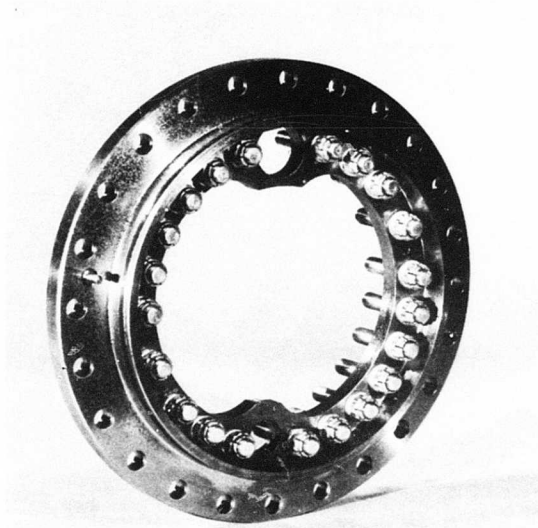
Rear View of Turbine Exhaust Case Adapter Assembly.
